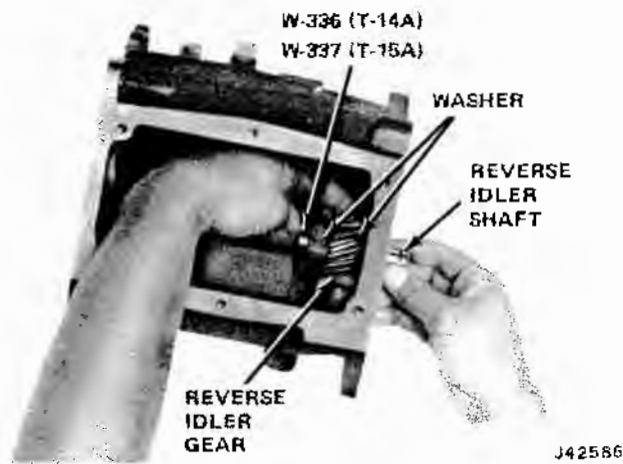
Reverse Gear Idler Gear Removal and Installation
